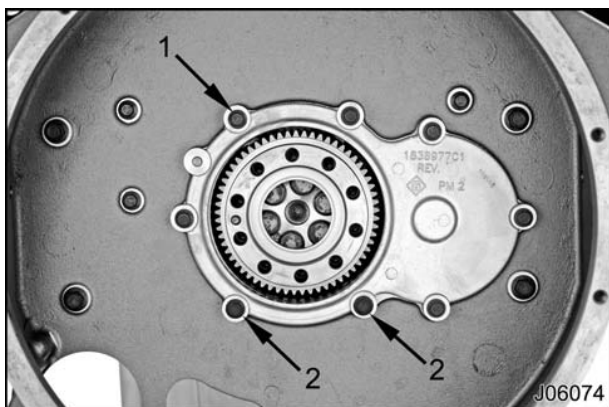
Rear oil seal carrier bolts (stripped chassis)
